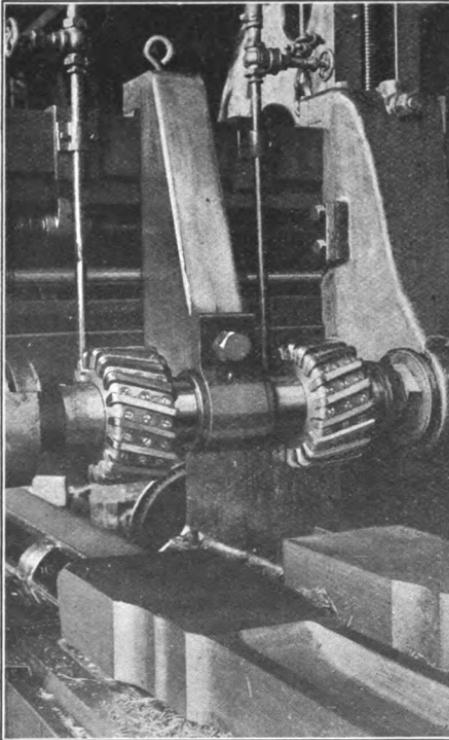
Helical Blade Channel Milling Cutters, with Intermediate Arbor Support
